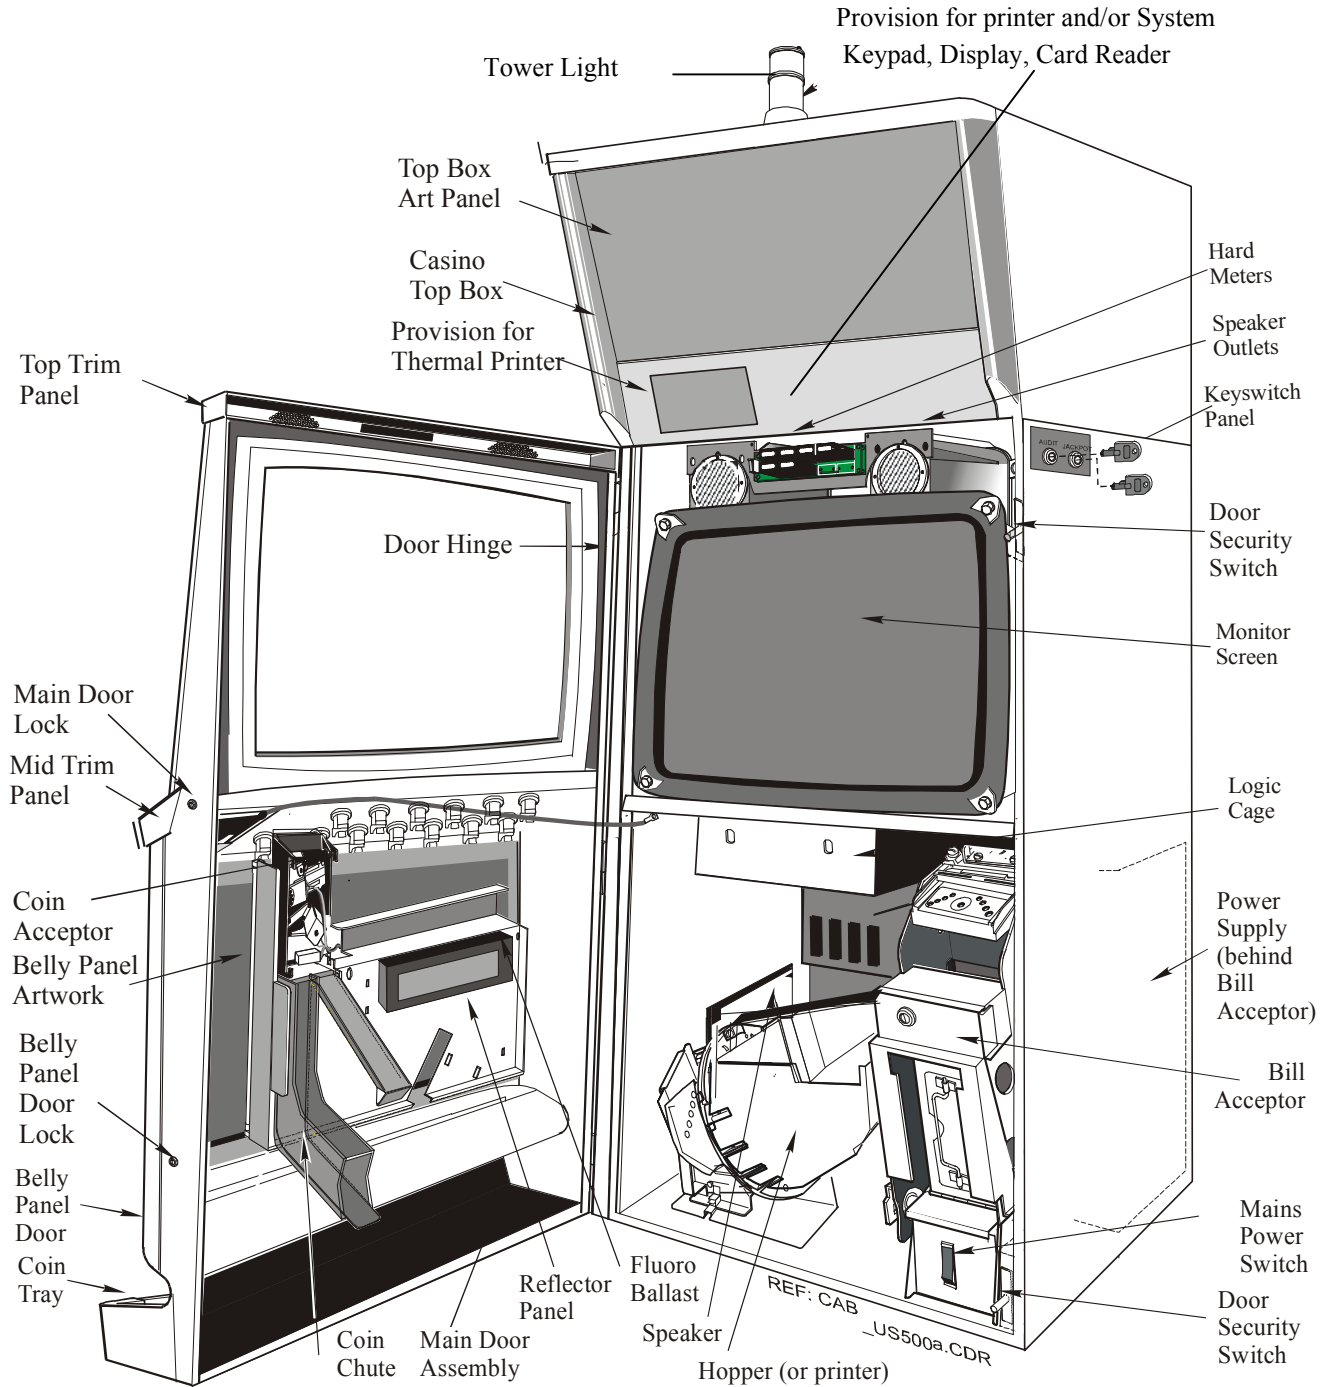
MAV500/MKVI Gaming Machine with Casino Top Box, Sound System and Bill Acceptor - Internal View
